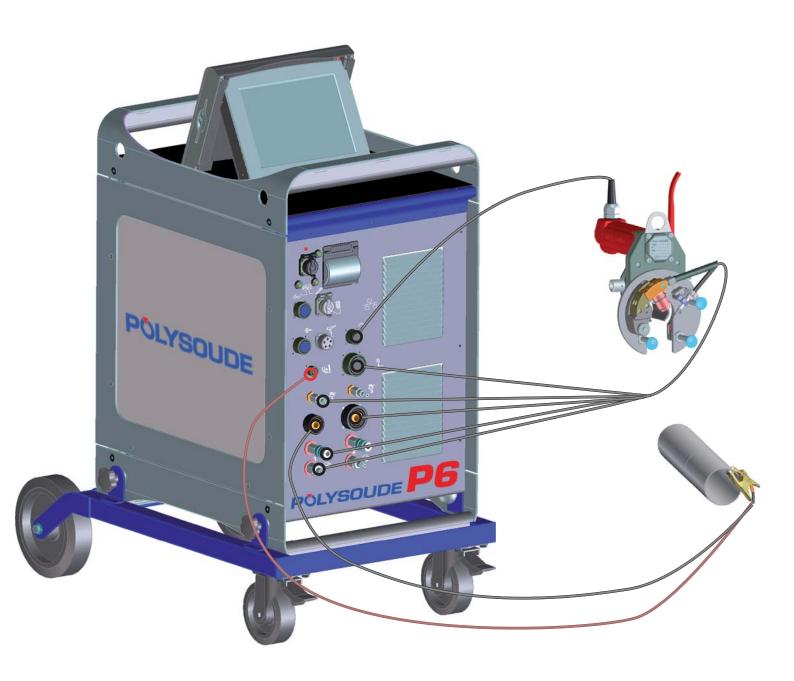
Connection of an open welding head of the MU type or a tube/tubesheet welding head of the type TS or TP
